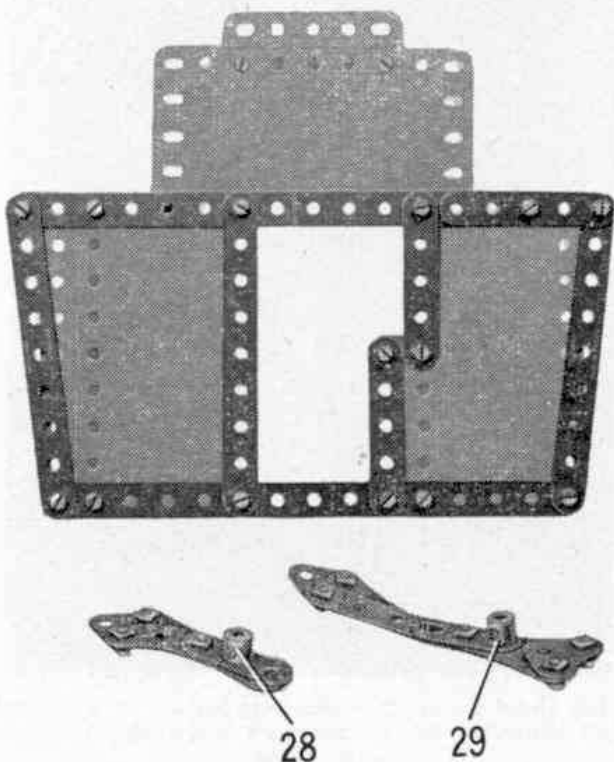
The removable back of the clock case and the hands are shown clearly in this view.
